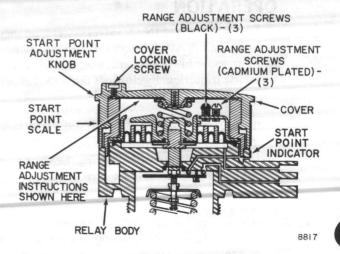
Adjustment Points of MO953/MP953A and B Gradutrol Relay.
